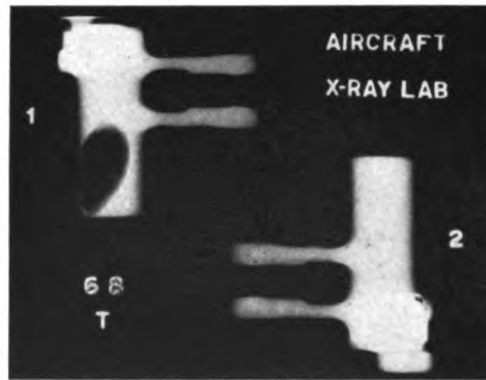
A Gas-Pocket in an Aluminum Casting.
